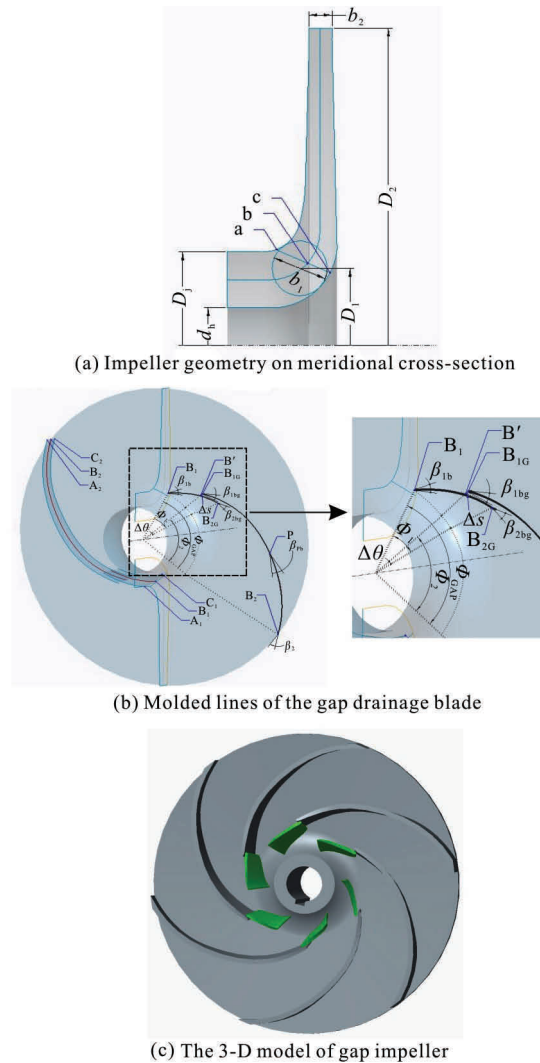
(Color online) Geometric drawing process of the gap drainage impeller
